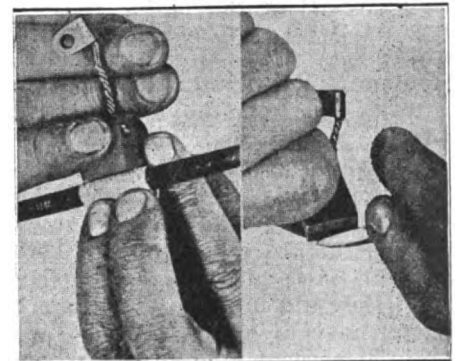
SANDING THE BRUSH SO THAT THEY WILL HAVE A FULL BEARING ON THE COMMUTATOR
